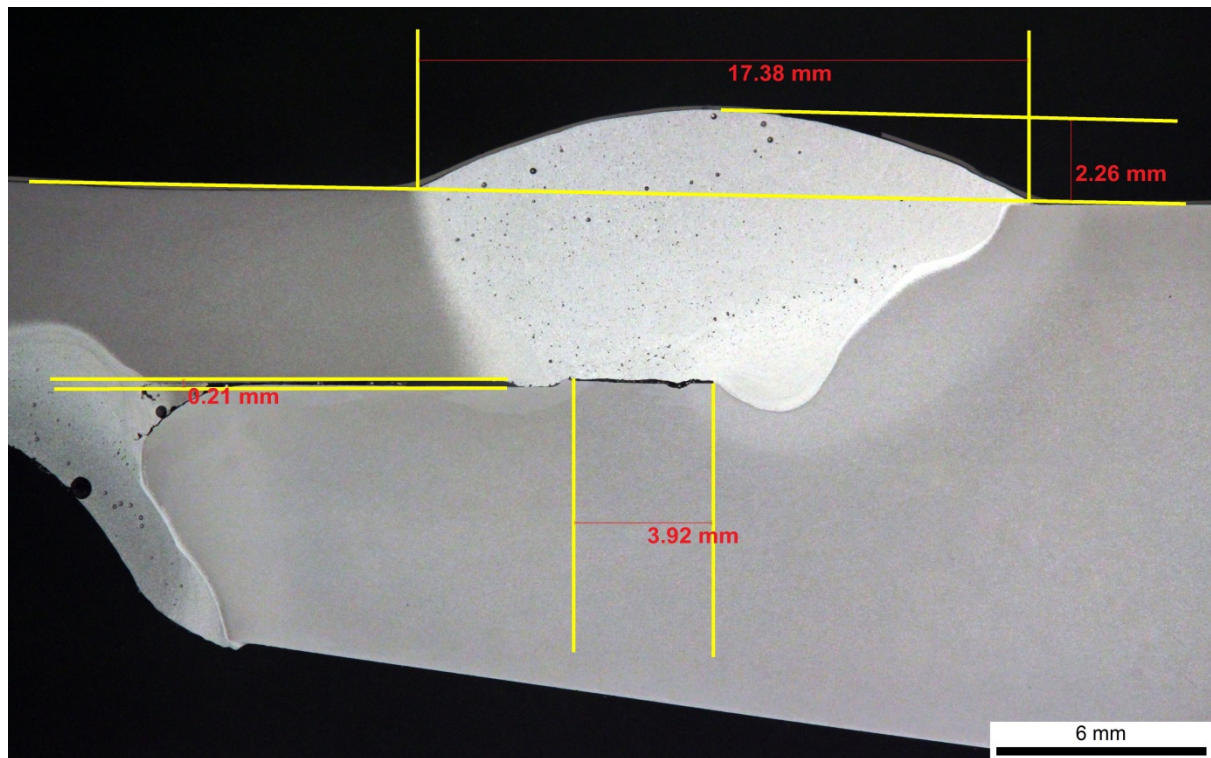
J3564 sample W07-08, slice 8, left hand side of Figure I96. Significant porosity and narrow throat size of internal fillet weld. Lack of fusion at weld root.
